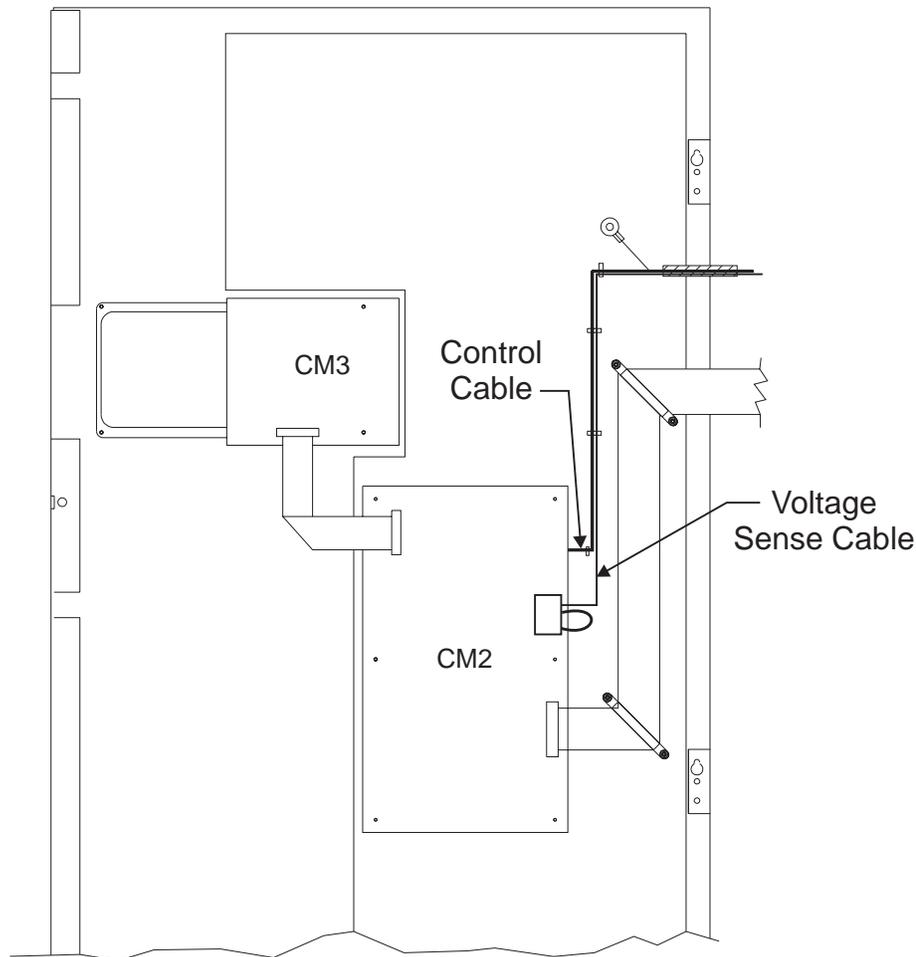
Plant Control Cable Assembly between Controller and Rectifier
